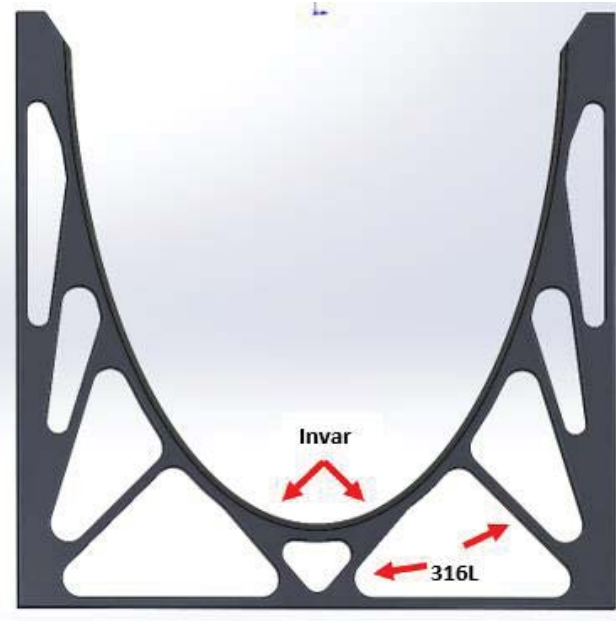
CAD drawing of the proposed Invar-36 cladded over 316L stainless steel tooling.
